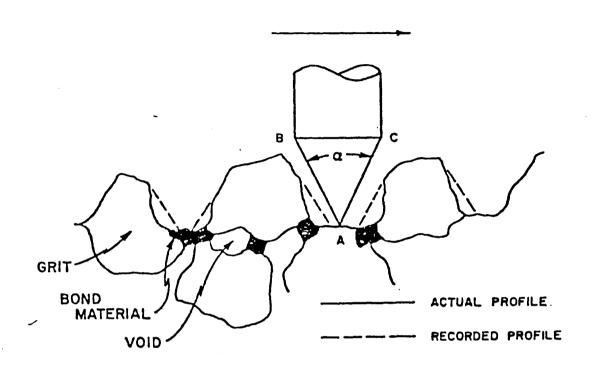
Induced distortion produced by the conventional profile measuring technique on grinding wheel cross section (after Deutsch, Wu, and Stralkowski)
